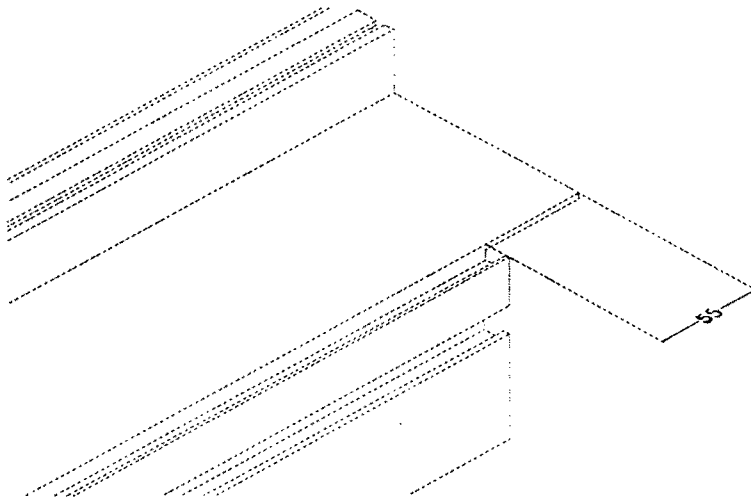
Processing drawing of bottom finishing member of top light("B" details)
